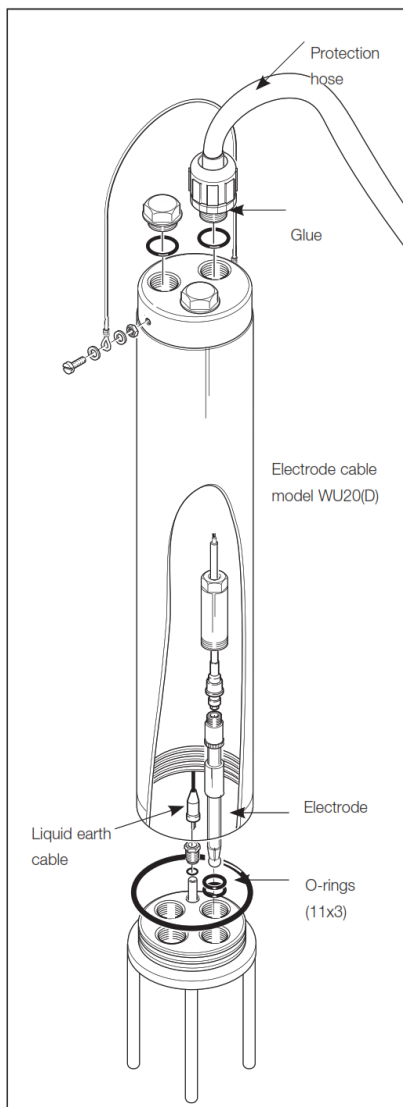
Mounting cables and sensors in 3-hole and 4-hole fittings
